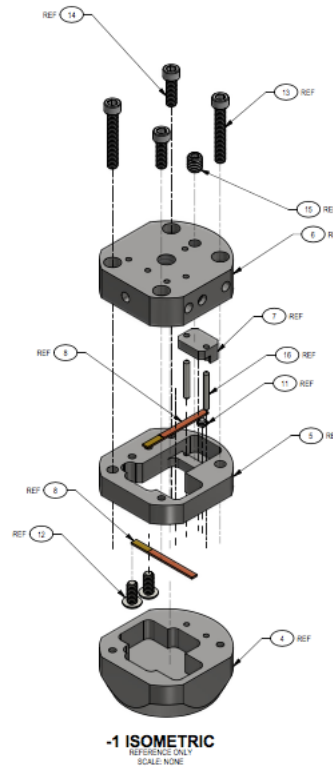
Exploded view of the RUSL holder final design. The holder is in three parts that include a clamp to holder the upper cantilever specimen and below this is the lower temperature witness specimen.
